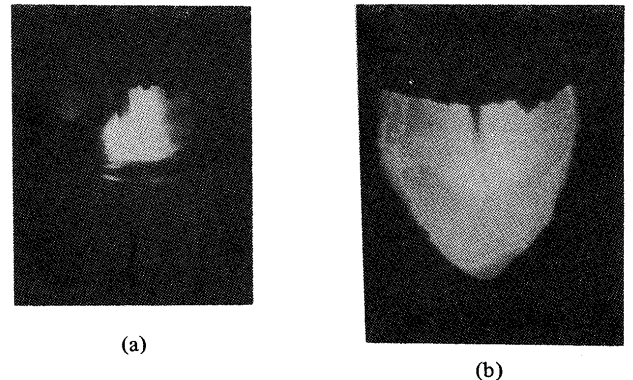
Images obtained during fillet welding of  $\text{CO}_2$  arc.
